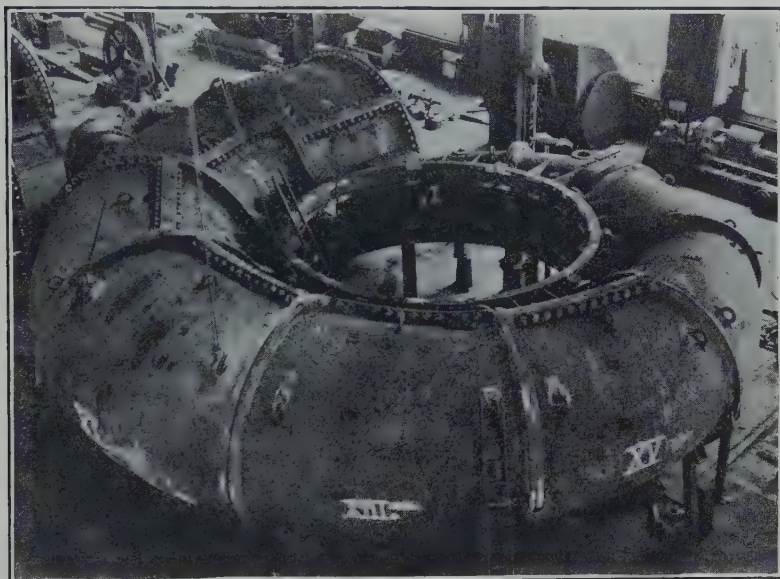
Sectional cast-steel spiral casing. Shop assembly for 70,000 h.p. wheel unit of Niagara Falls Power Company. (Courtesy I. P. Morris Department, William Cramp and Sons.)
